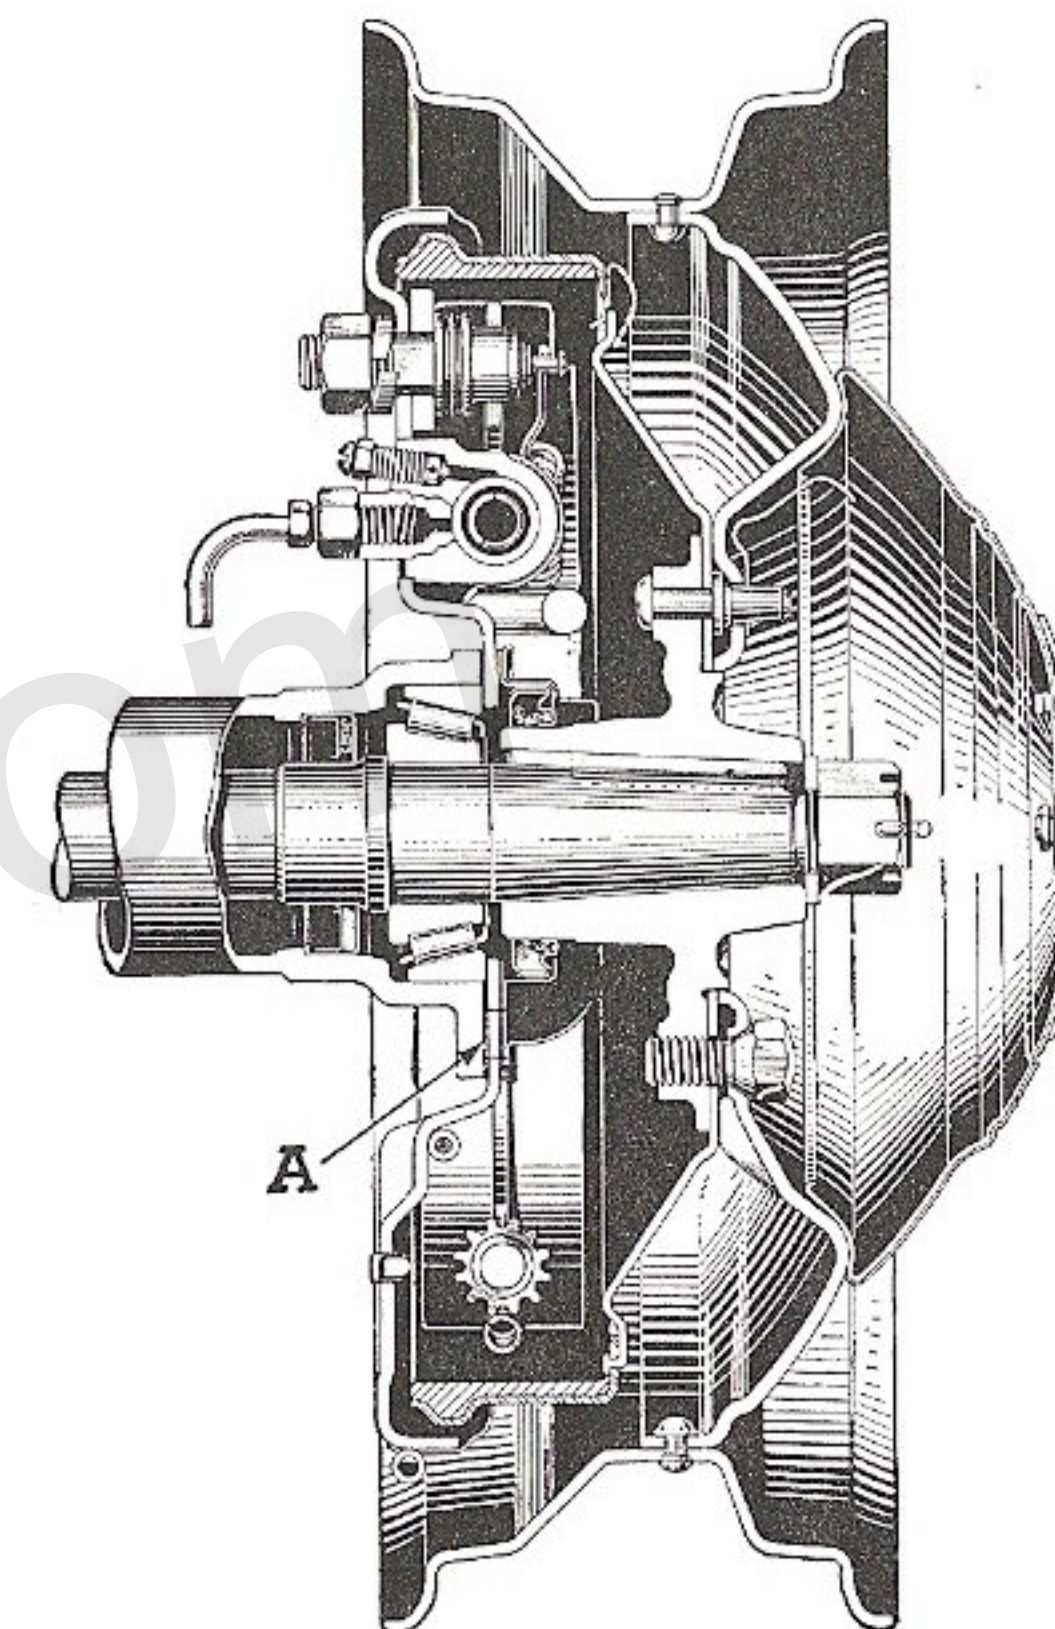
Rear Wheel Bearings are Shim Adjusted
